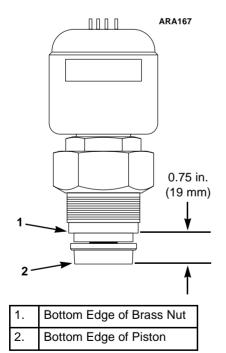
Stepper Motor and Piston Assembly with Piston in Fully Open Position
